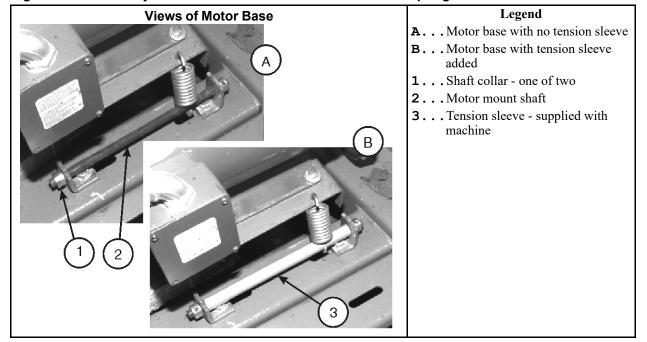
How to Adjust Belt Tension On a Machine That Uses Spring Tension
